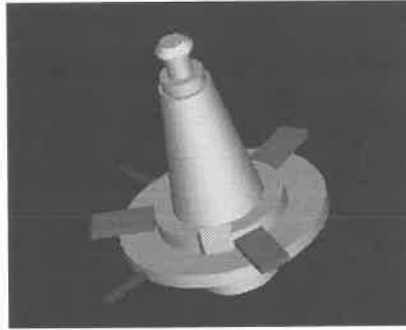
Target disk mounted on the tool holder with rectangular and cylindrical capacitance gauges targeting at it (Pro-E)
